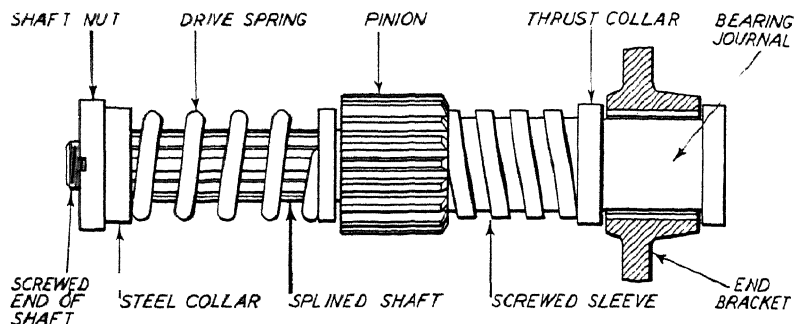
COMPRESSION DRIVE (INBOARD PATTERN)
